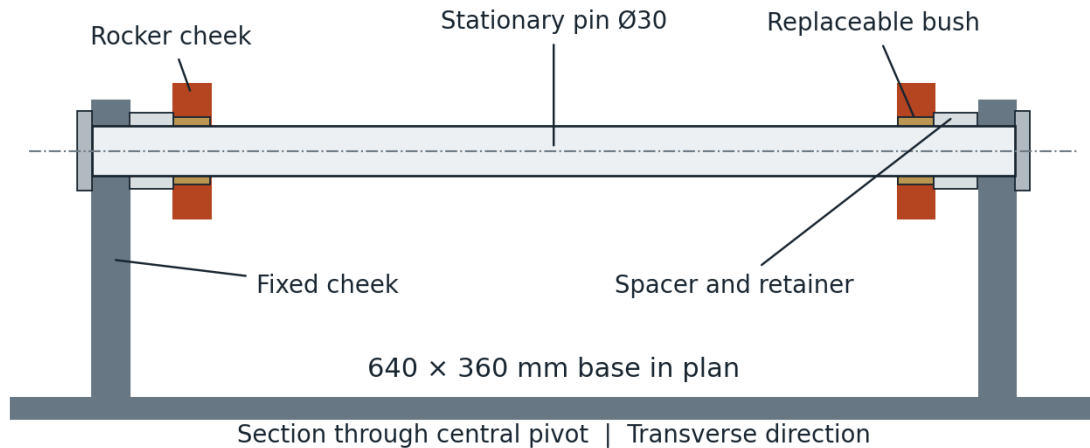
Central pivot section from the concept dimensions. The Ø30 mm pin is stationary; the bushes move with the rocker. Running fits, lubrication, seals and positive fastening details require specification.
